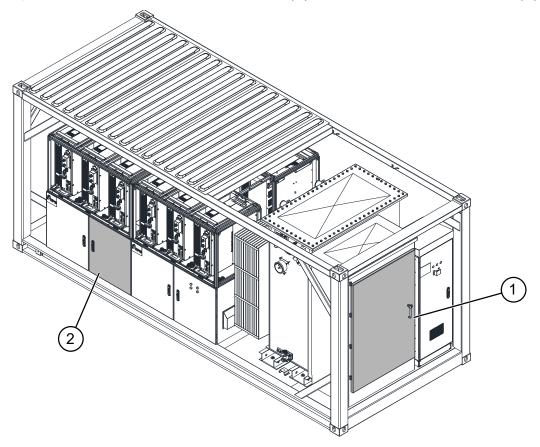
HV Chamber Door and DC Cabinet Door
